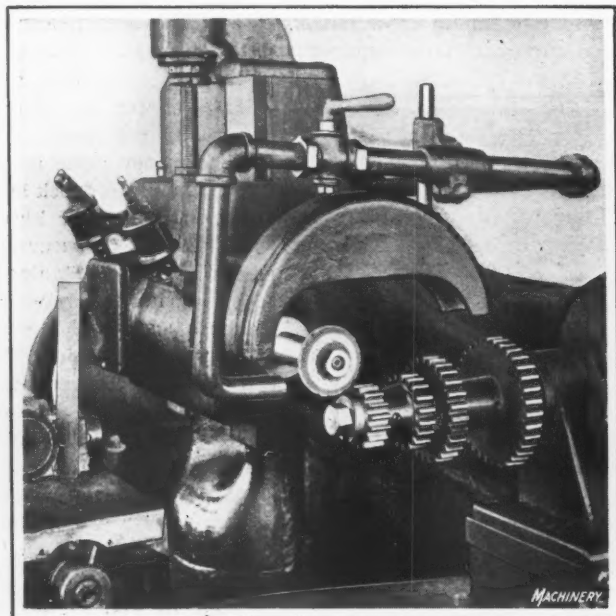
Use of Small Formed Wheel for grinding Cluster Gears
